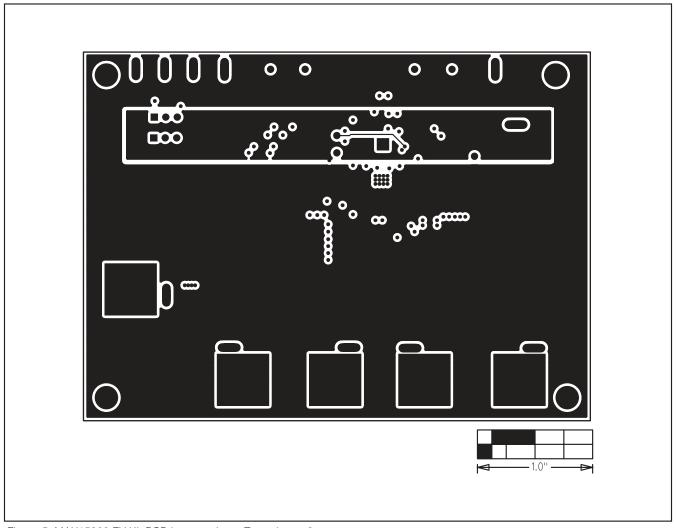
MAX15023 EV Kit PCB Layout—Inner Trace Layer 3
